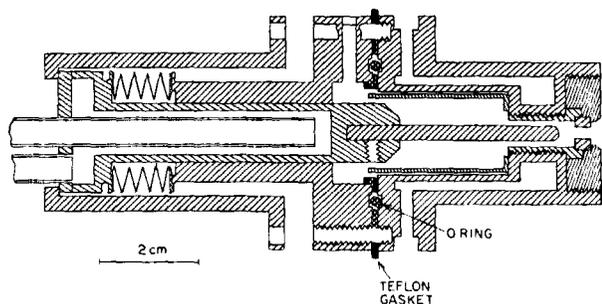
Cross-sectional view of assembled anode and cathode structures.
